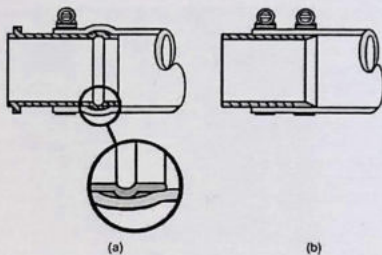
(a) Incorrect and correct installation of hoses on fixed pipes. (b) Hoses attached to stainless steel pipes should be clamped at the very end of the pipe to minimize the amount of dead space between the clamped portion and the end of the pipe. *Courtesy of Huub Lelieveld, personal communication.
